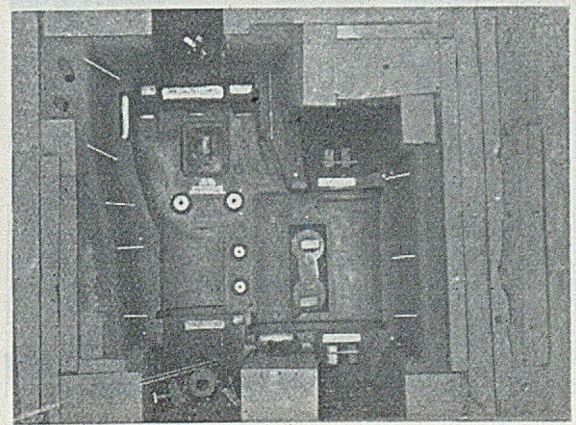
Bottom-part of Cylinder Mould after Drying and Placing of the Smaller Cores.
